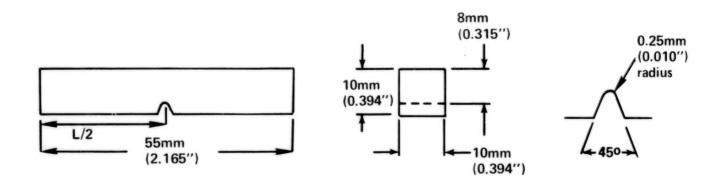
Charpy (Simple-Beam) Impact Test Specimen, Type A
